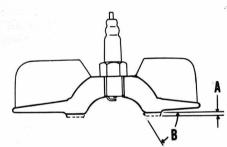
Angle of taper (B) must be remachined in head after it has been modified for higher compression.
